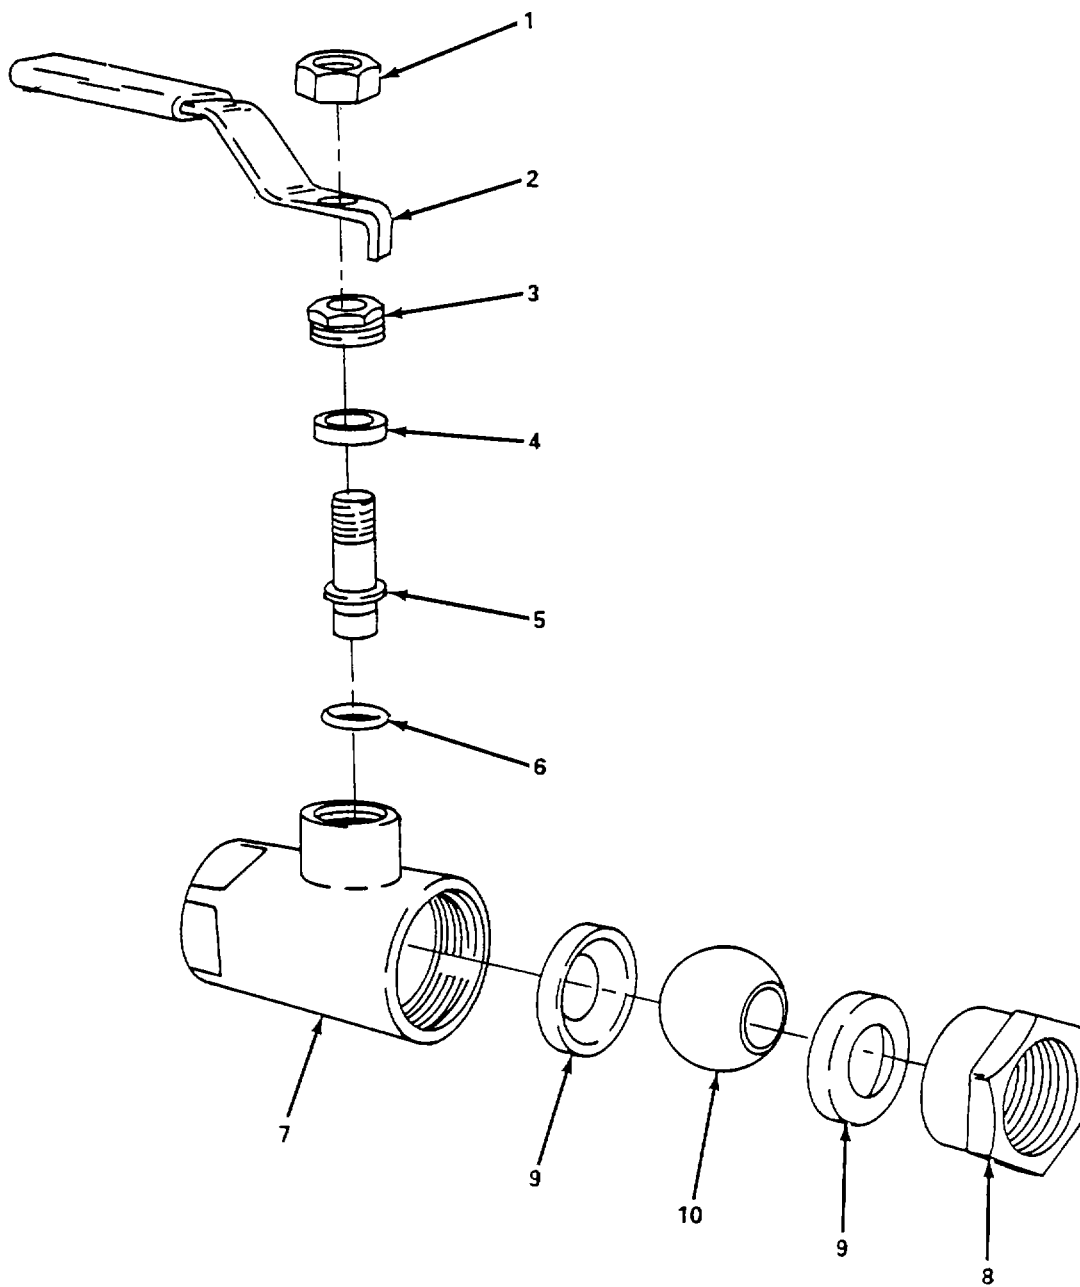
Ball Valve 3/4 Inch, Repair.
